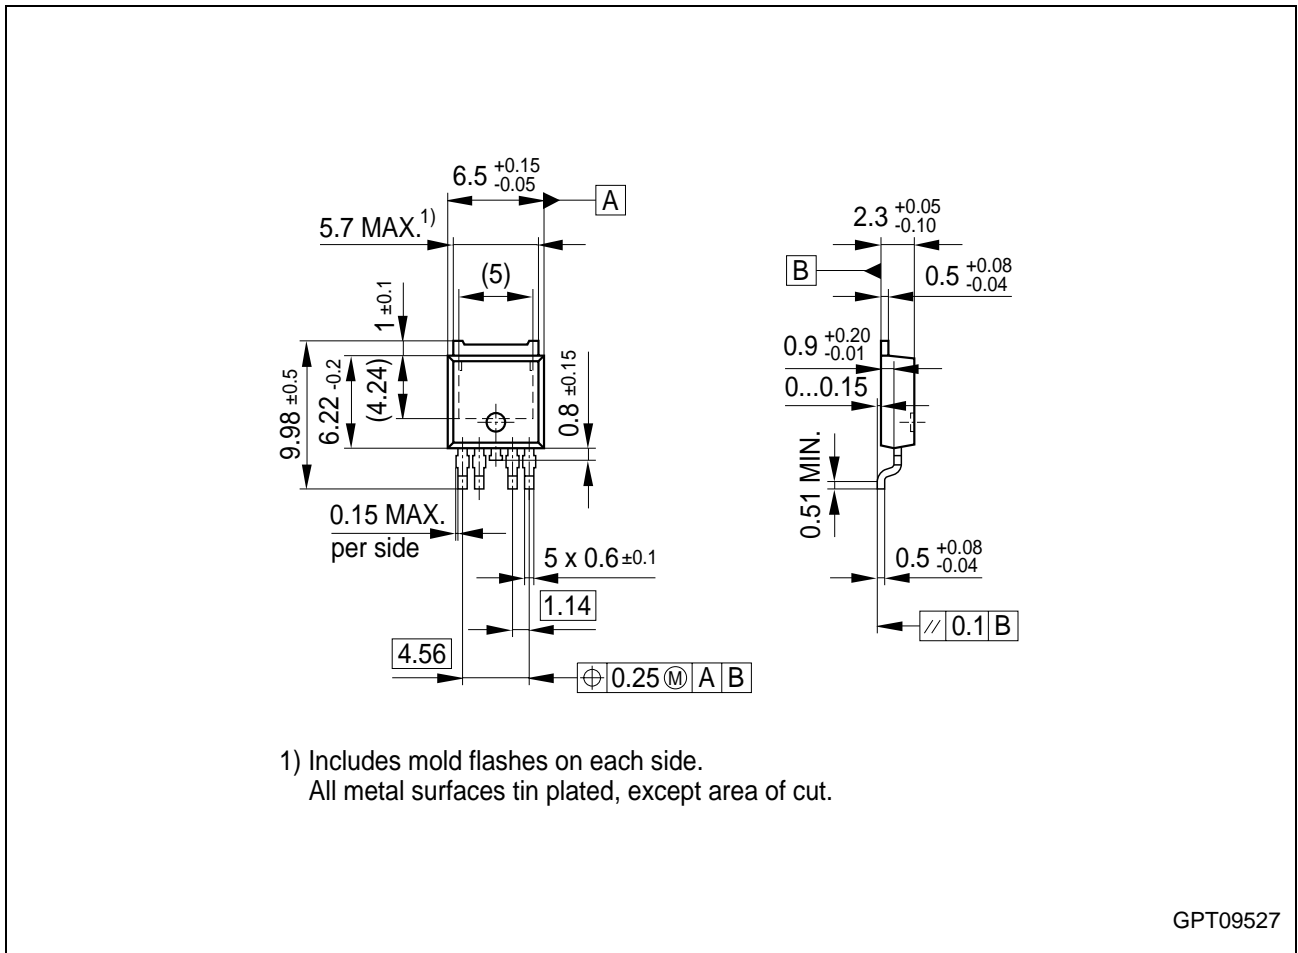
P-TO252-5-11 (Plastic Transistor Single Outline)
